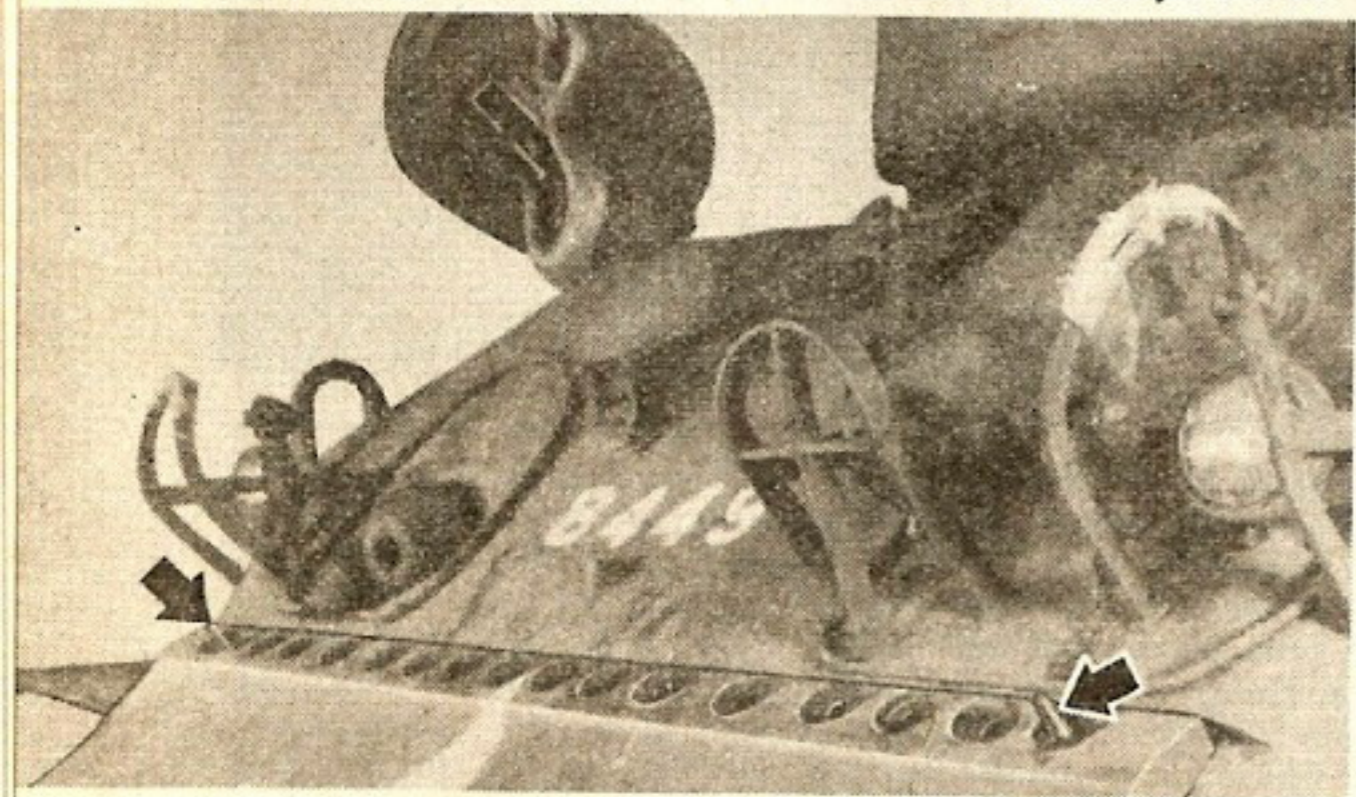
With the small cigars acting as hinges, lower the unit enough so that the eye can be removed. Be sure the line from the rear winch is taut—with the eye removed, it's the sole support of the final drive. Now, with the line from the rear winch, raise the unit back into place. Here's where the pair of larger cigars come into play; use them to align the bolt holes. Pound them, as shown above, into the outer bolt holes on top. From here on, it's just routine. Replace all the bolts, knocking out the aligning cigars when most of the bolts are in. Tie up all the linkages, and lines, on the inside; put back track, fenders, etc.
